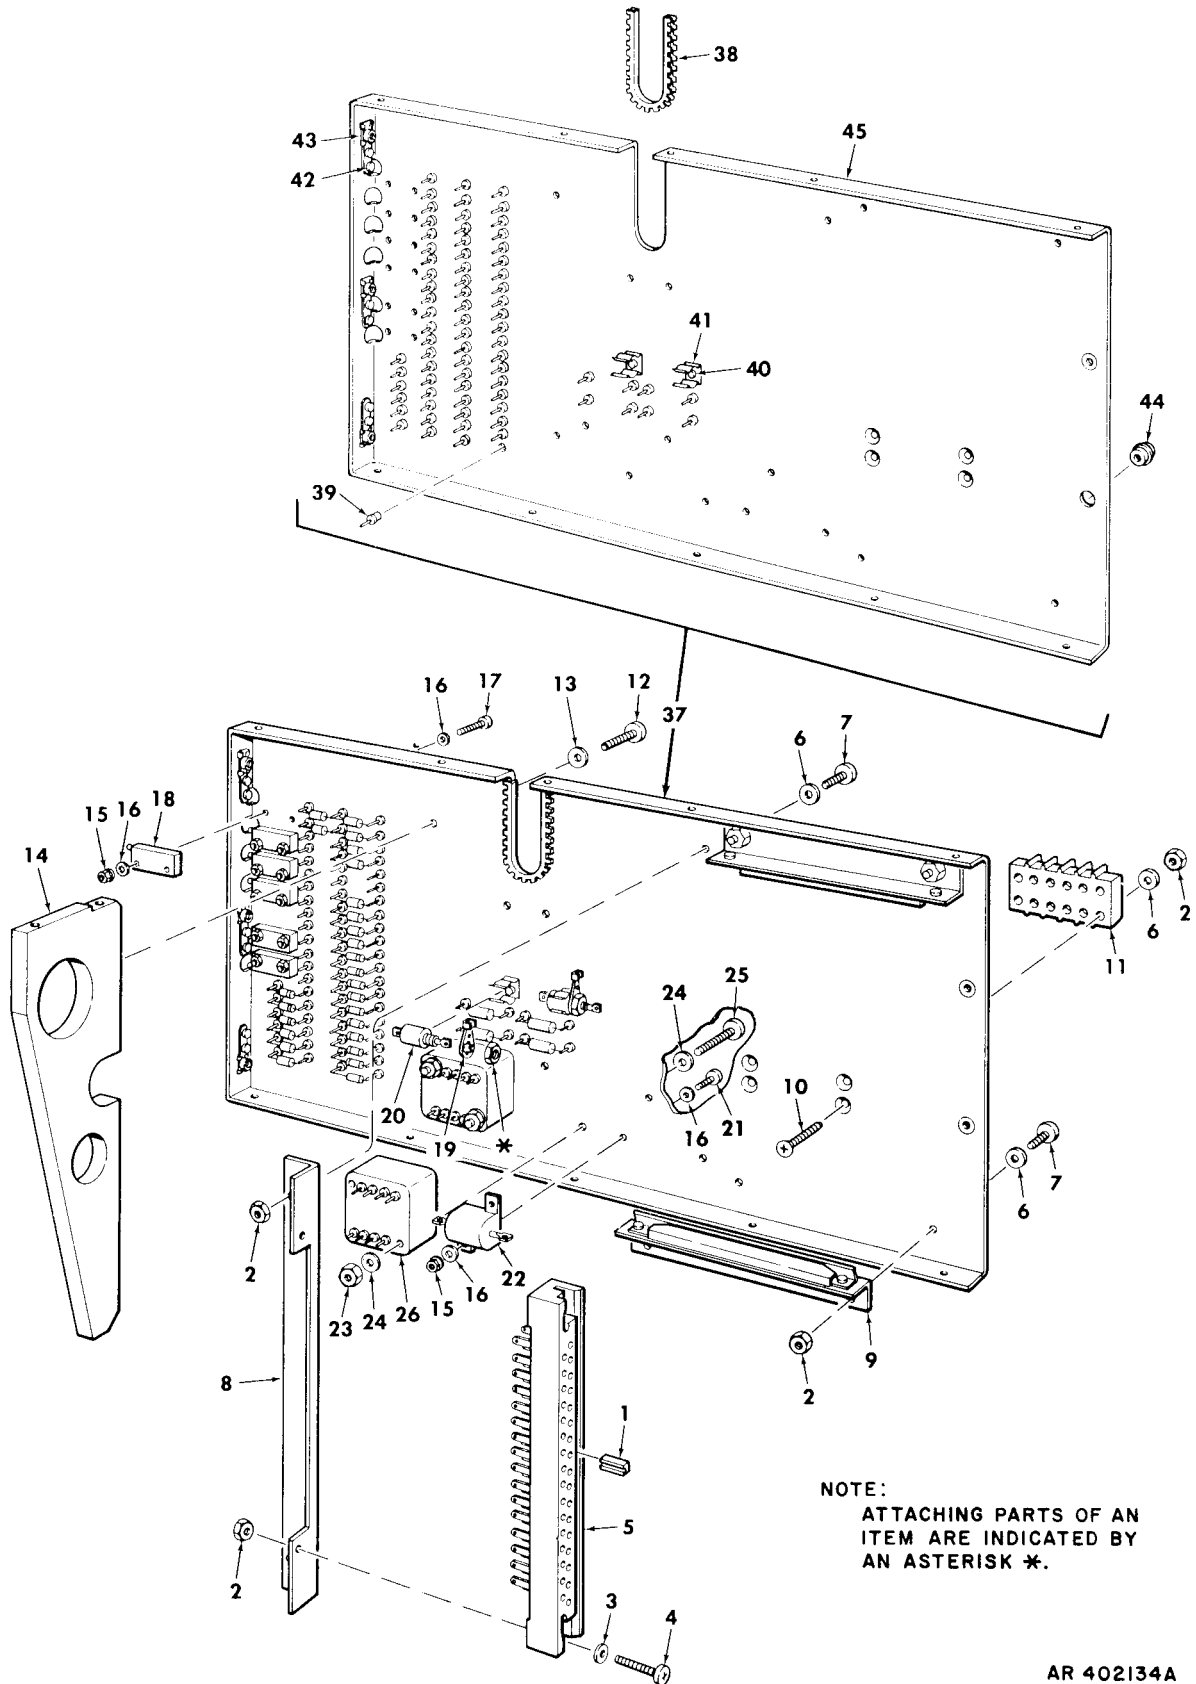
Rear bracket assembly (sheet 1 of 2)
